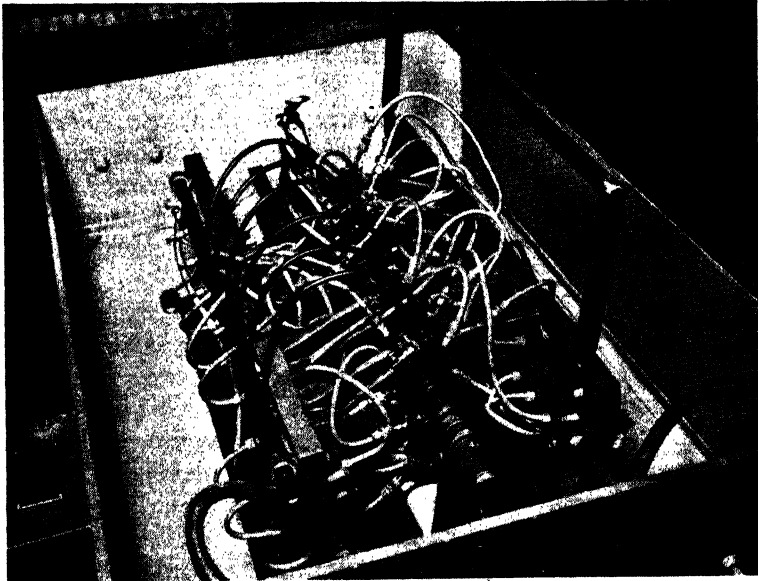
Shorter Type W.I. Automatic Hardening Machine, showing view of a camshaft mounted on the centres with the heating and quenching set up ready for automatic operation. 30/50 shafts per hour.
